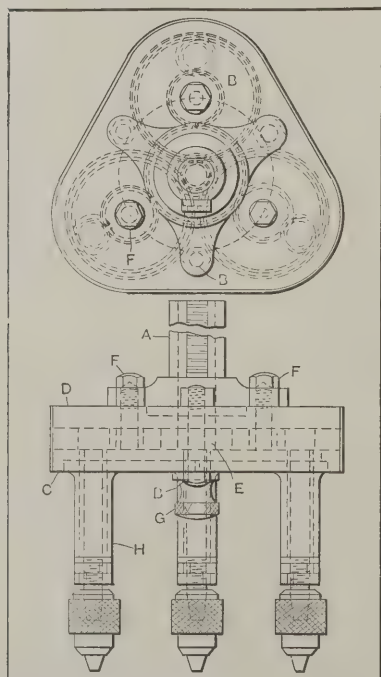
Elevation and Plan Views of the Three-spindle Drilling Attachment
